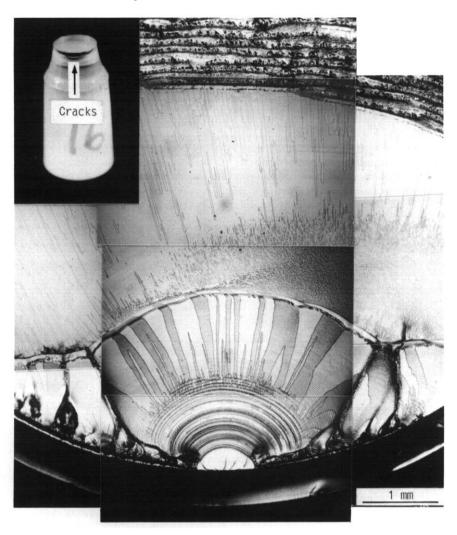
Appearance and fracture surface of the fatigue specimen presoaked in methanol for 120 h. $N_f = 22430$
